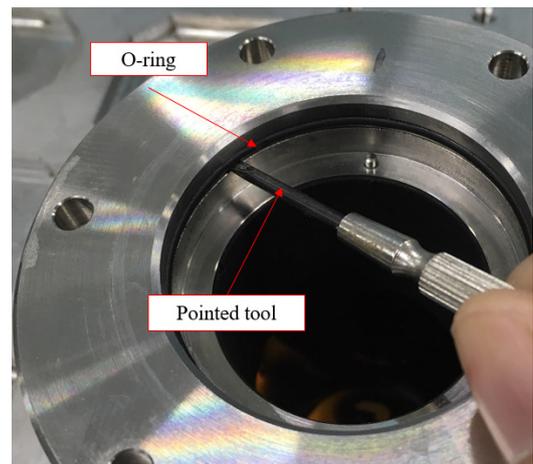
O-ring (shaft seal type) is removed by hooking it with a pointed tool.
